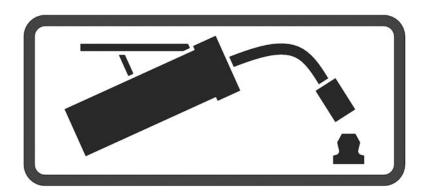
The grease fitting label is attached to the yoke grease cover on the saw frame assembly. Remove the cover to grease the yoke. (Part no. 03-113-06.)
